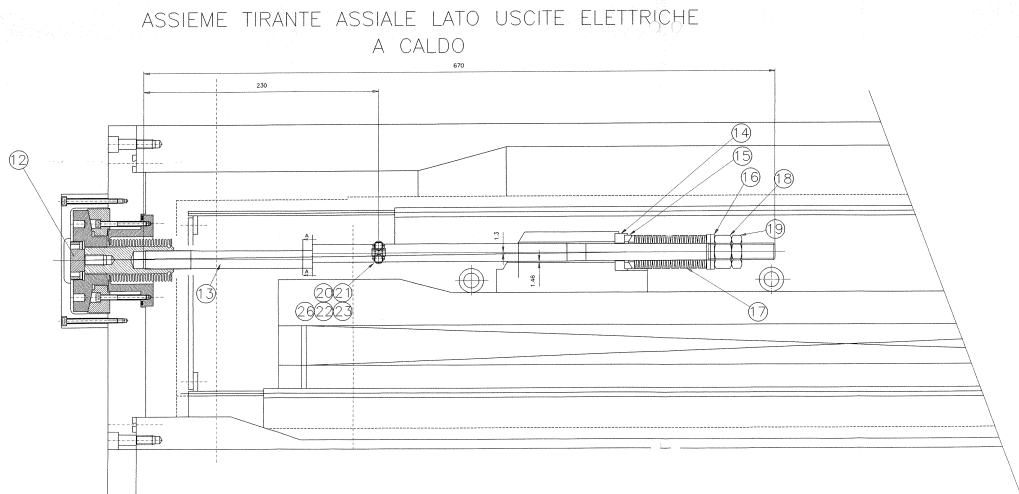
Original Ansaldo drawing: Axial Tie Rod Assembly
